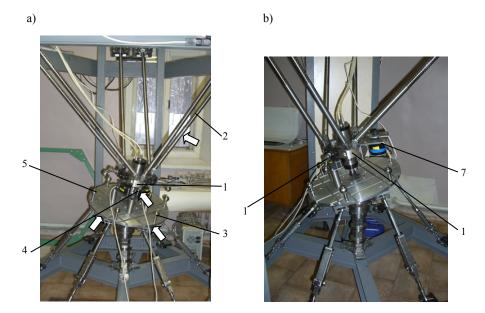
Technological complex that includes a parallel kinematic machine and rolling table and – front view, b – side view
